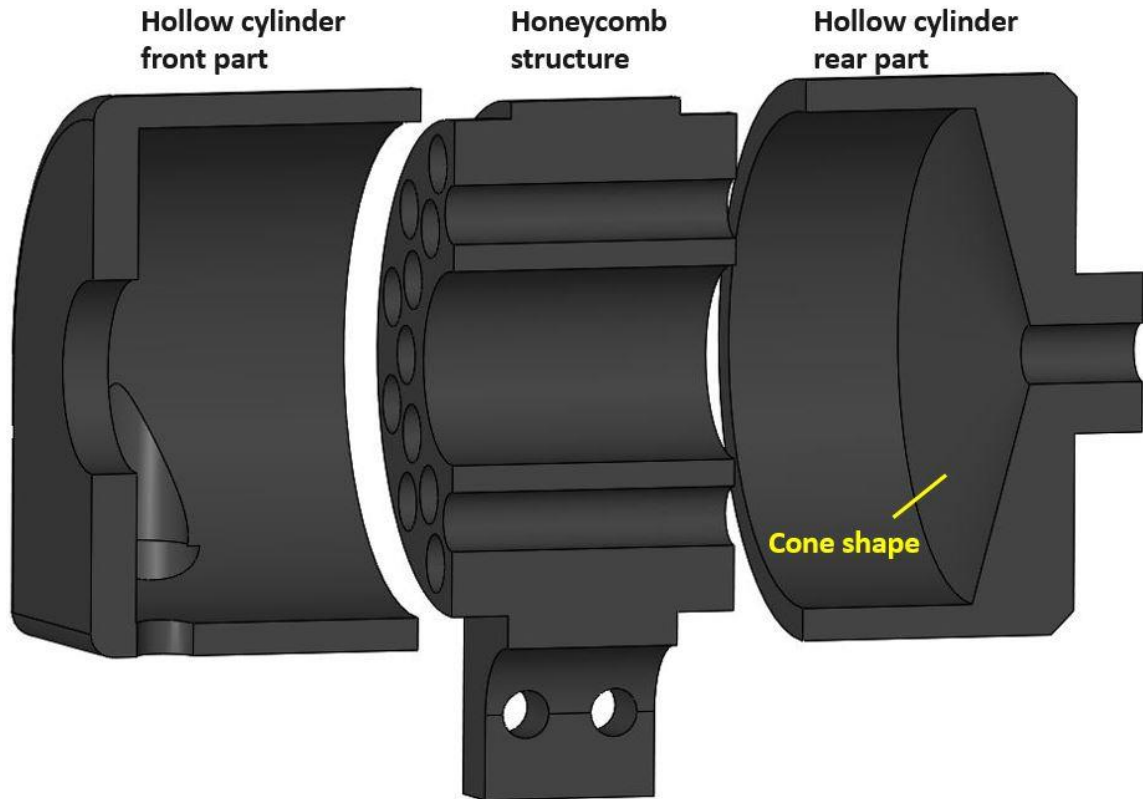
Cross section of the exploded view for the nuzzle upper part
